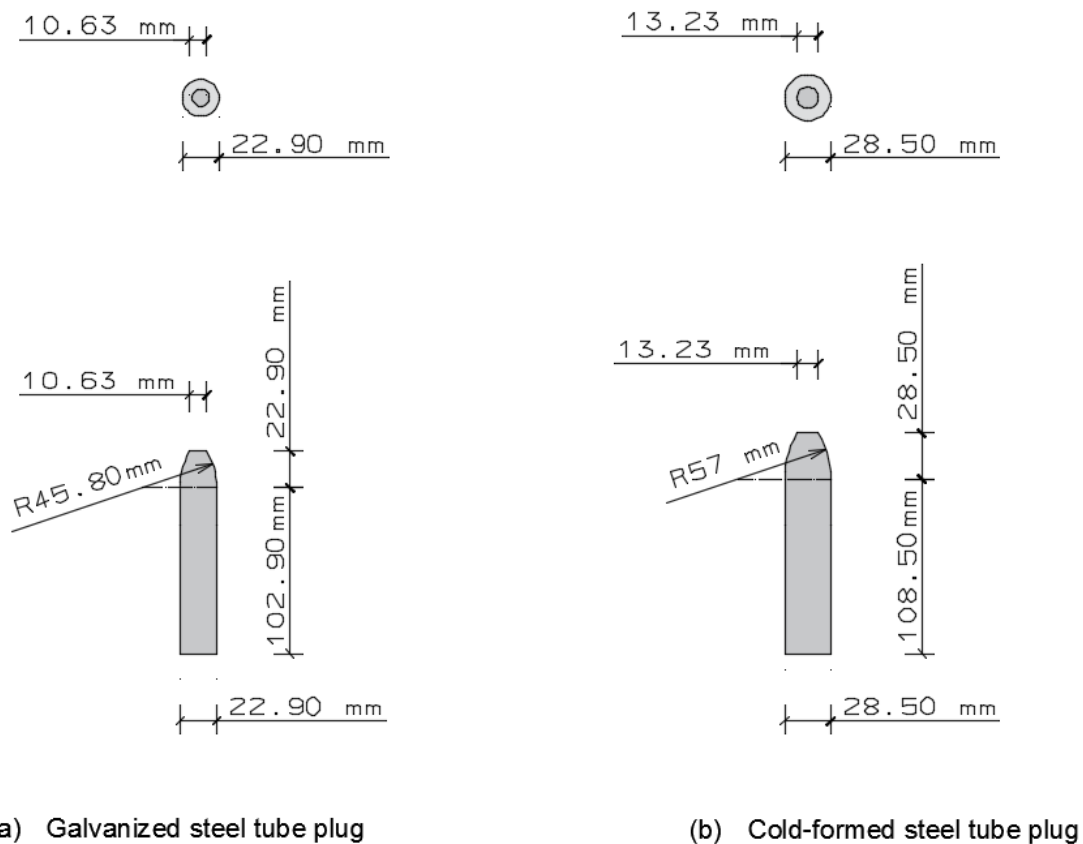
Metal plugs: (a) galvanized steel tube plug; and (b) cold-formed steel tube plug
